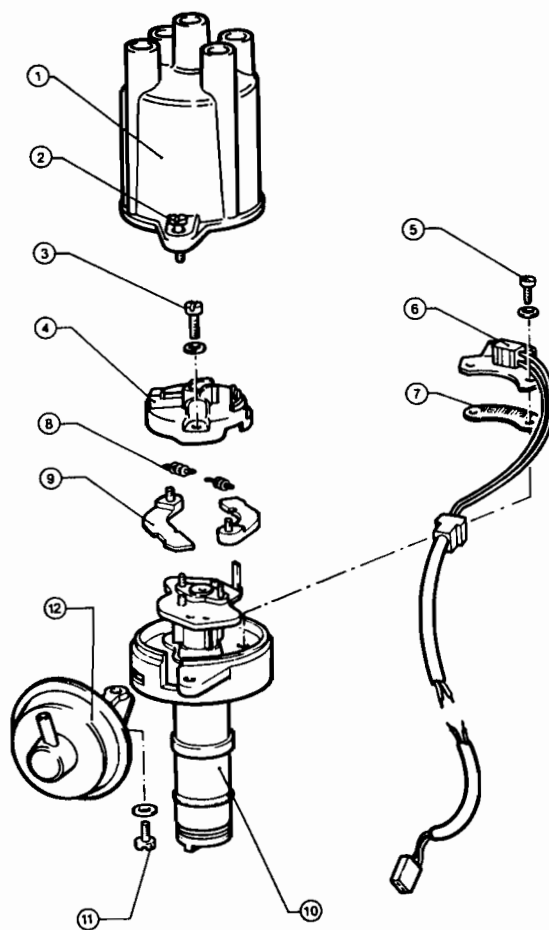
Exploded view of Marelli breakerless distributor (Sec 6)
